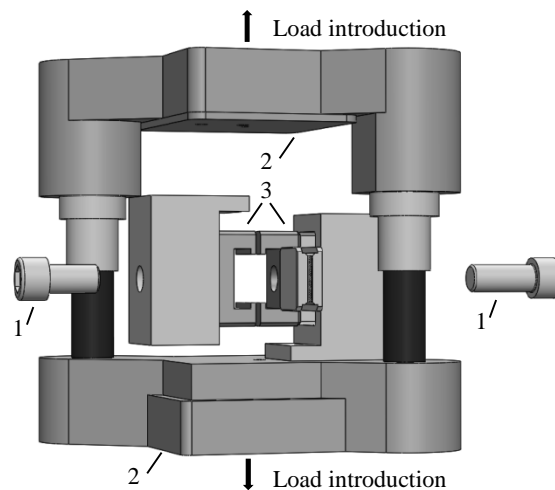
Multipin shear-out test setup (1 – fixing screws, 2 – ball bearing supported upper and lower structure of test fixture, 3 – specimen mount)
